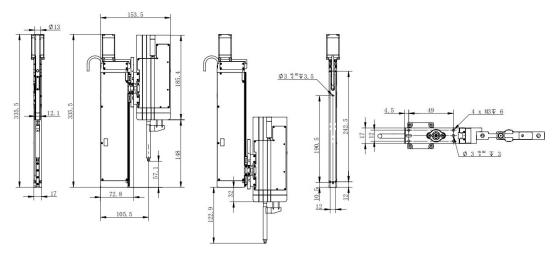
SP13-HSZ Assembly Dimensional Drawing
